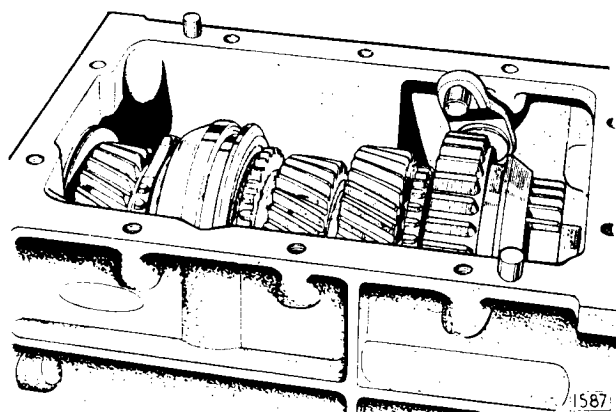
The top cover removed showing the layout of the mainshaft gears
